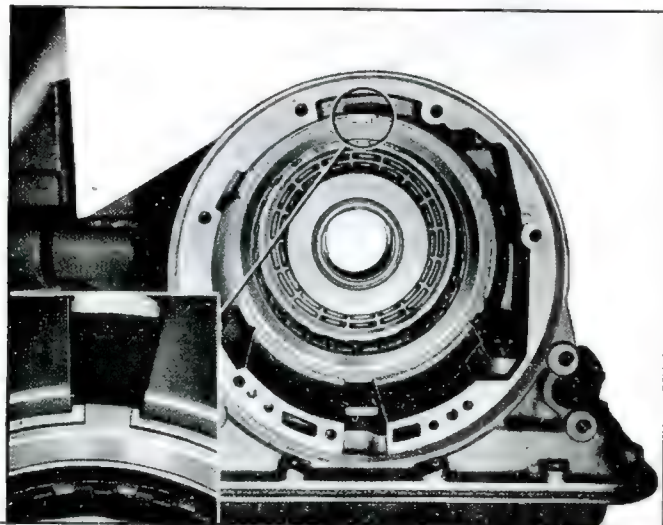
E-52—Reverse Clutch Pack Retaining Ring
